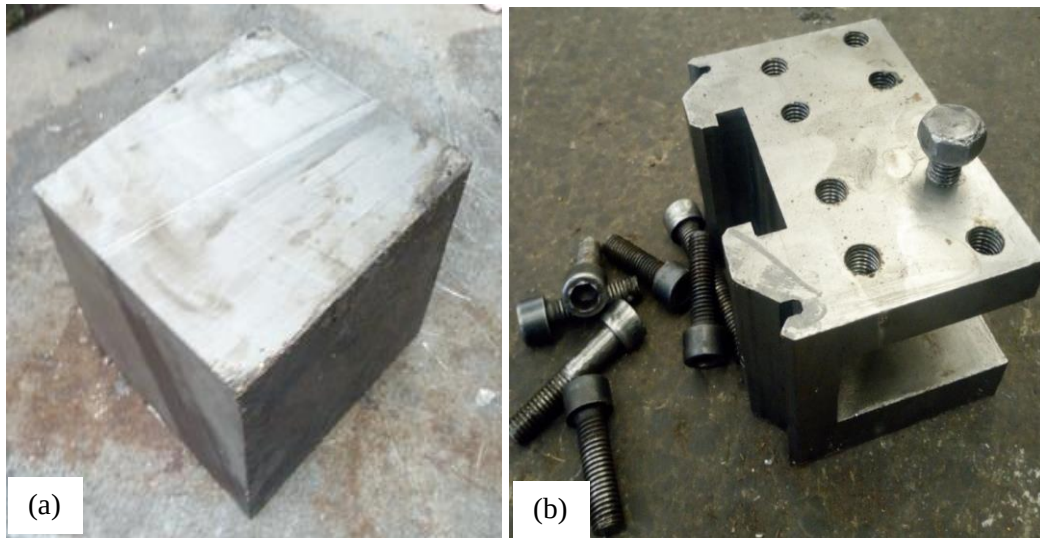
Photo of the cutting tool holder (a) stock part and (b) machined part
